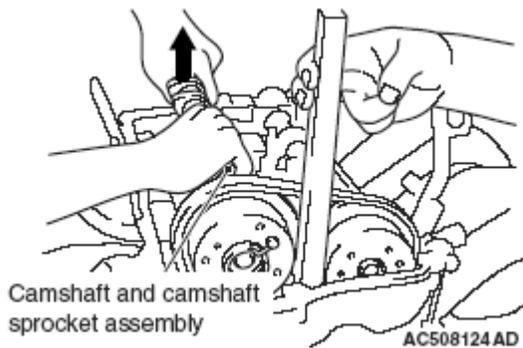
Removing Camshaft And Camshaft Sprocket Assembly (Exhaust Side)
